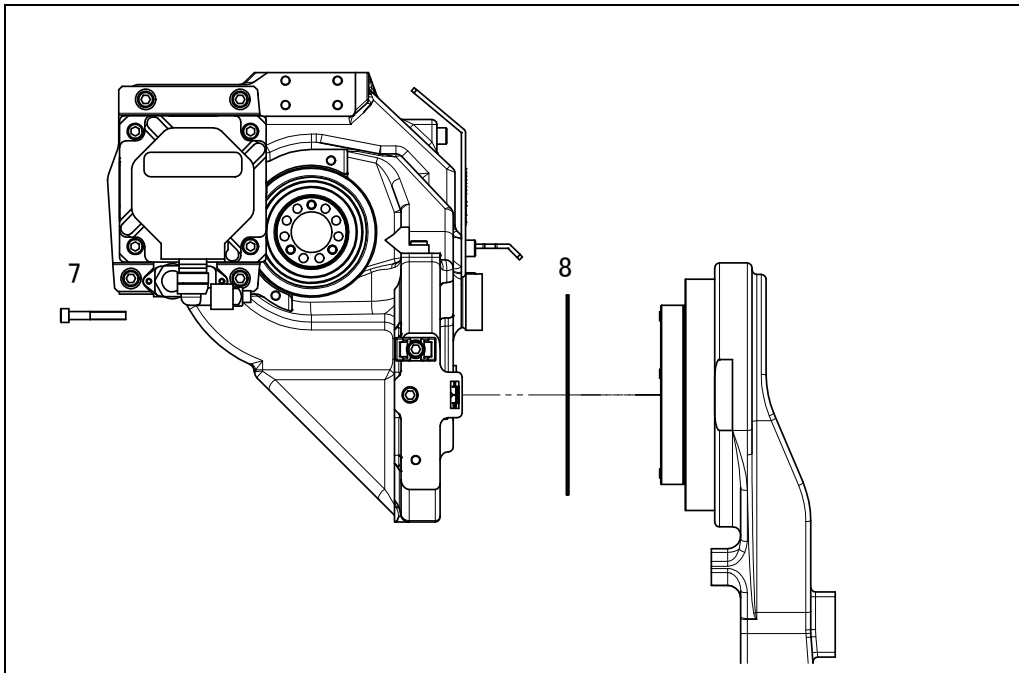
(b) Replacing the J4-axis gearbox (2/2)
